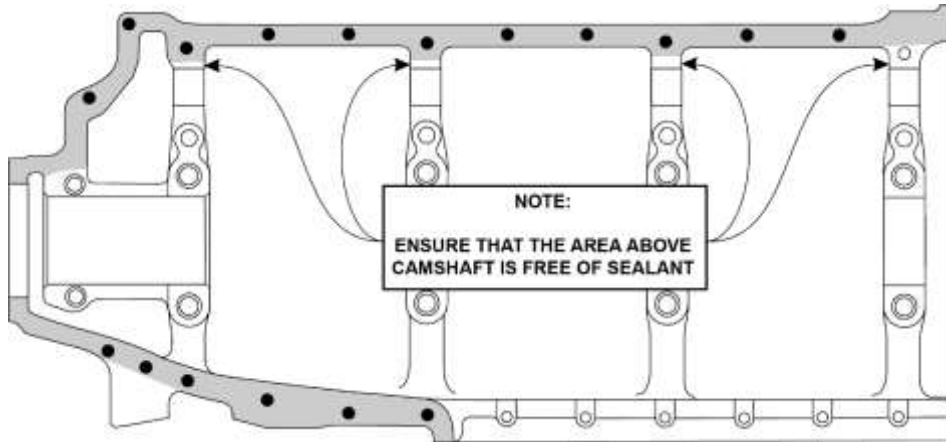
Sealing of crankcase parting surfaces with LOCTITE® 515, 518, or RTV-102 sealant without silk thread is as follows:
